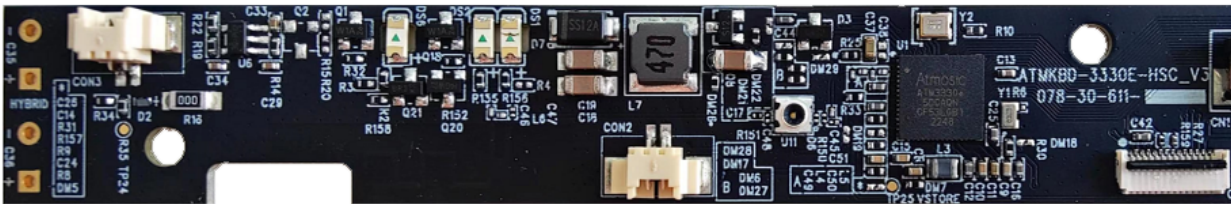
Marked Positions on the Top Side of Keyboard PCB
